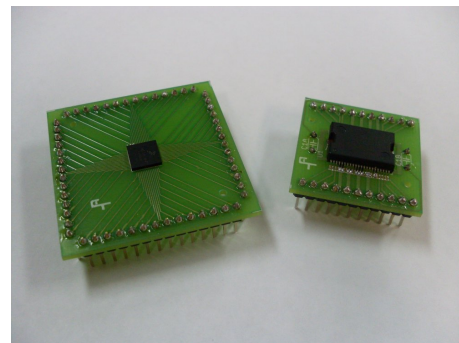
SMD adaptor boards: a 56-pin QFN adaptor for the MC34704 is shown on the left and a 44-pin HSOP adaptor for the MC33932 is shown on the right.
